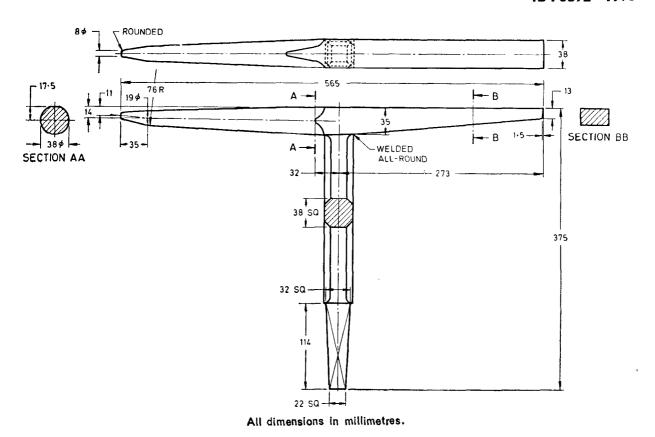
DIMENSIONS FOR BICK-IRON, TYPE C
